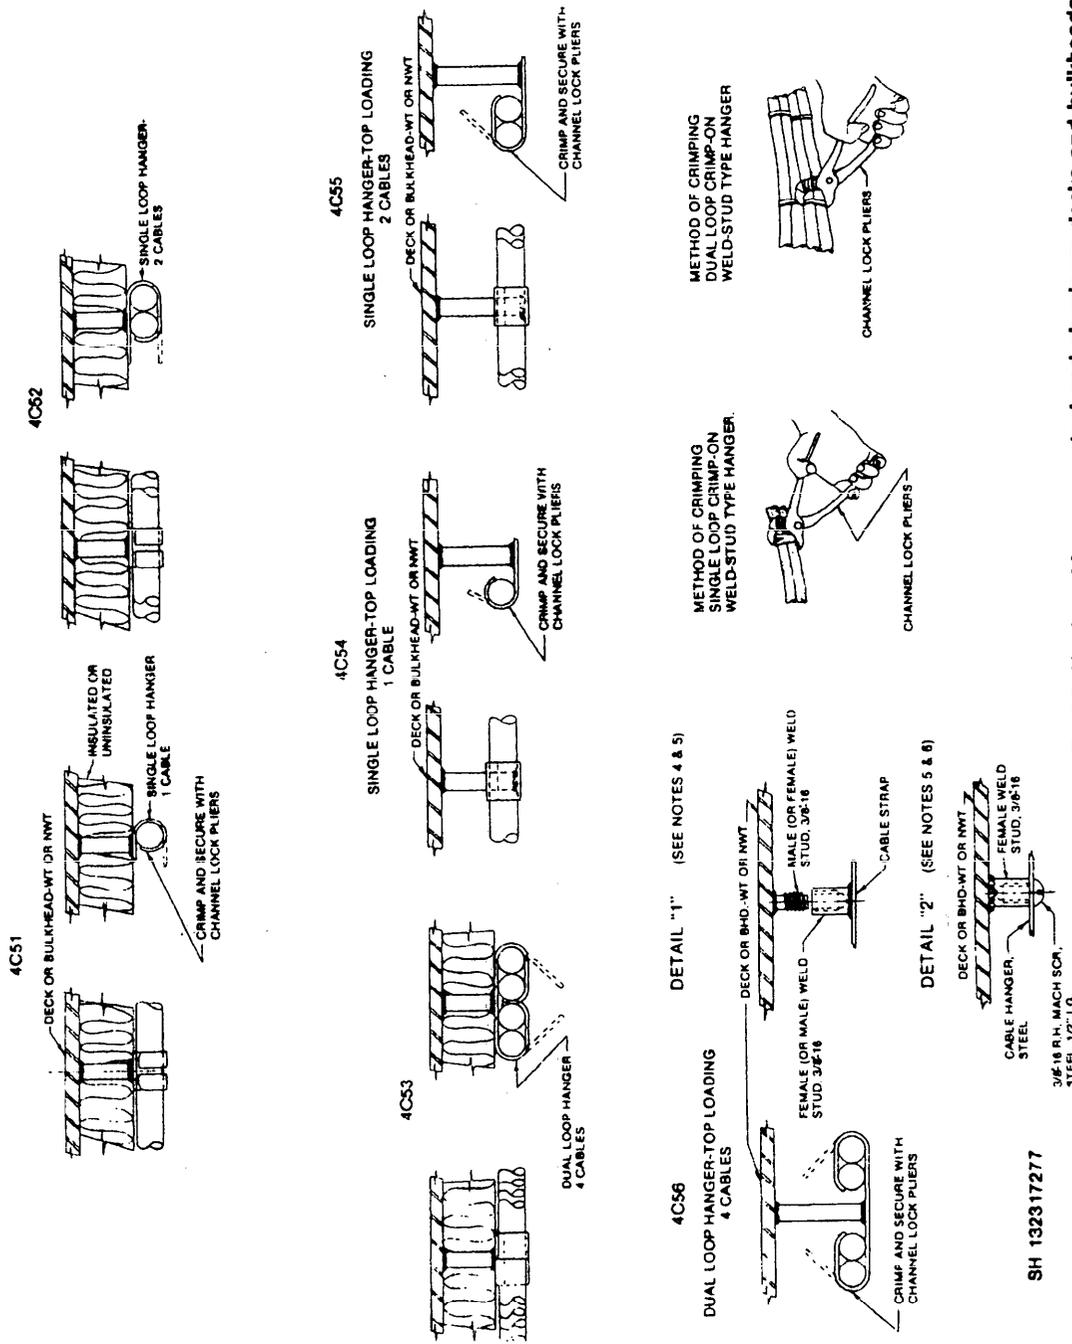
C5 Single cableway on steel and aluminum decks and bulkheads.
